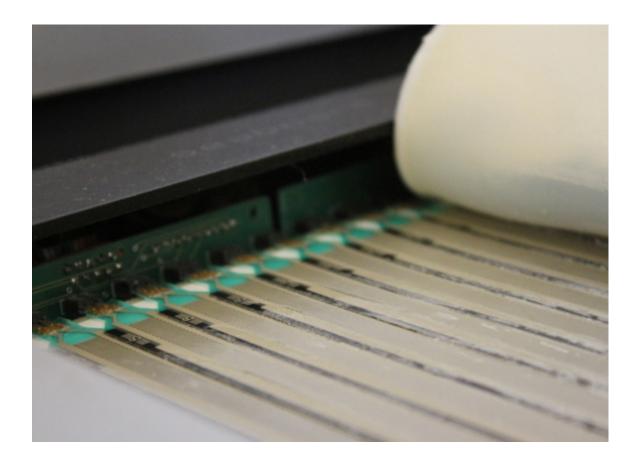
Seaboard 3 sensor to PCB connection (left perspective detail) February - September 2010
